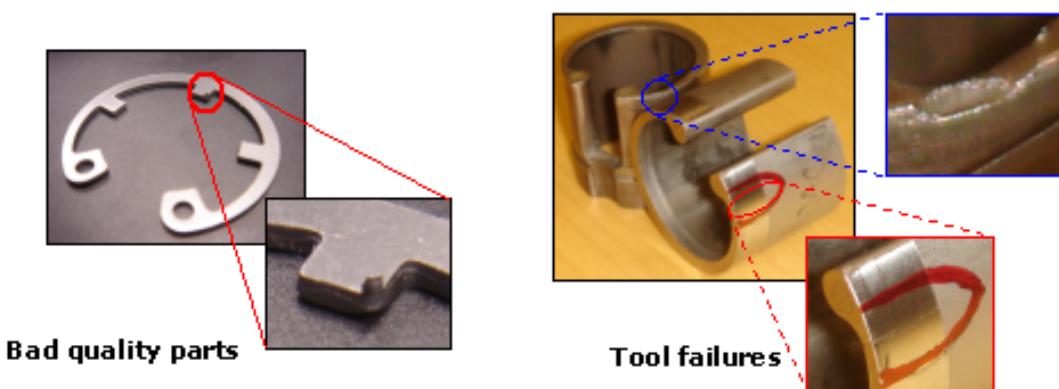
Part with “pikuta” and micro cracks in blanking punches
